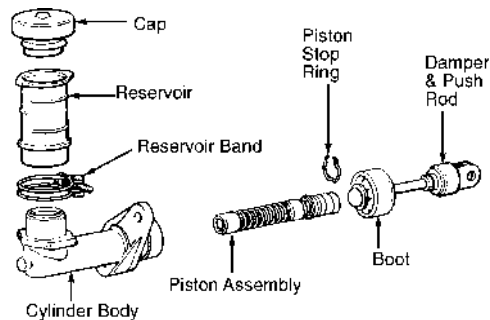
Exploded View Of Clutch Master Cylinder (Typical)
